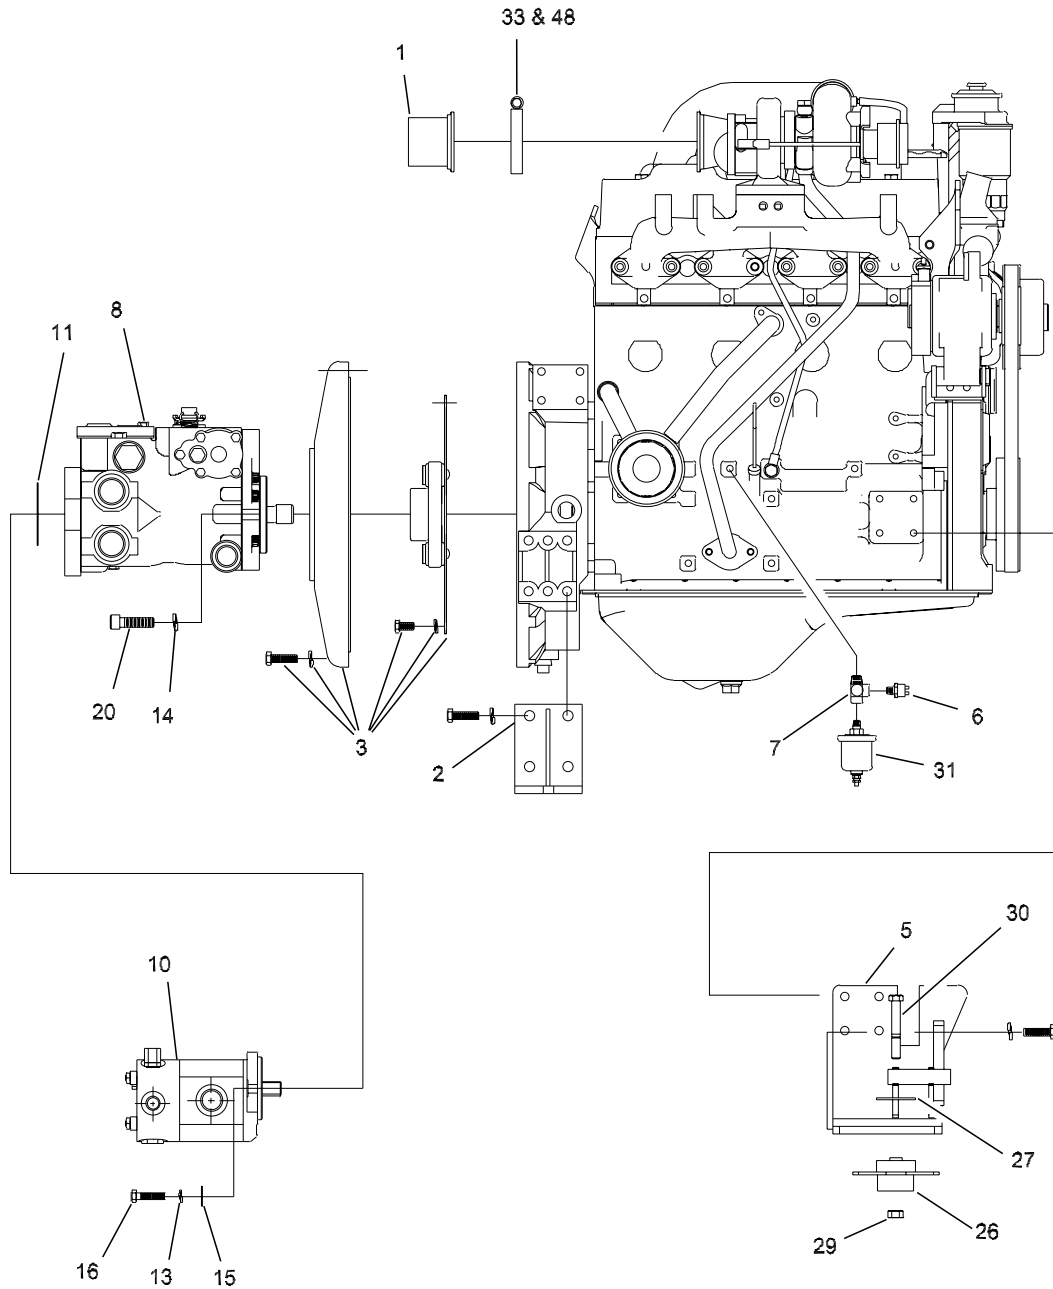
ENGINE SUBASSEMBLY, CUMMINS (SHEET 2 OF 2)
